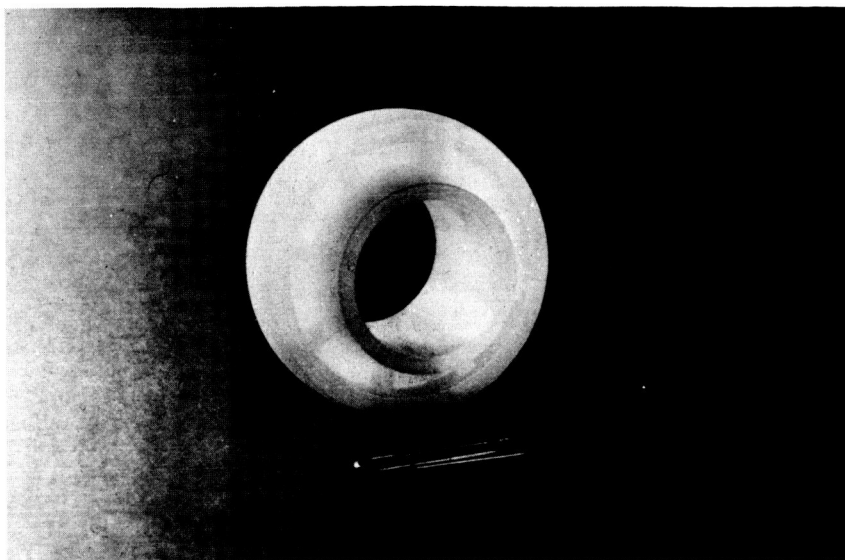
Self-aligning bearing of zytel nylon resin.
